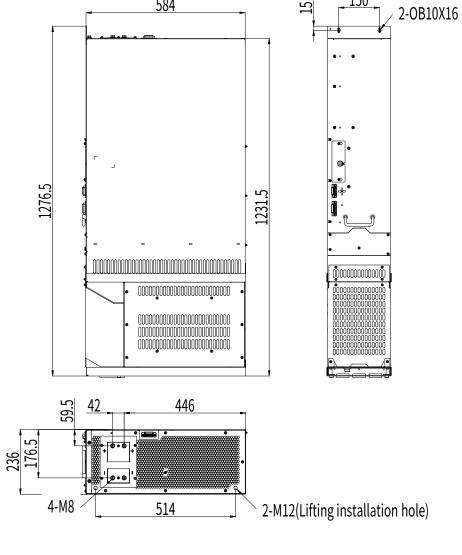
2*A8i frame installation dimensions (unit: mm)
